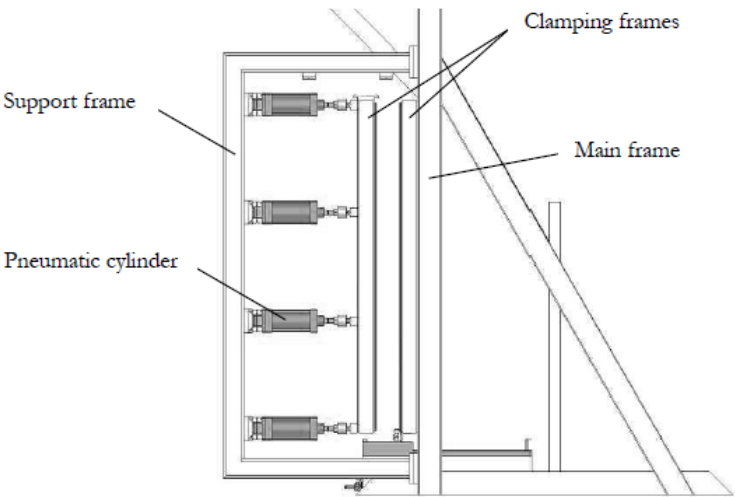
CAD design side view of modified set-up with pneumatic cylinders [2].
